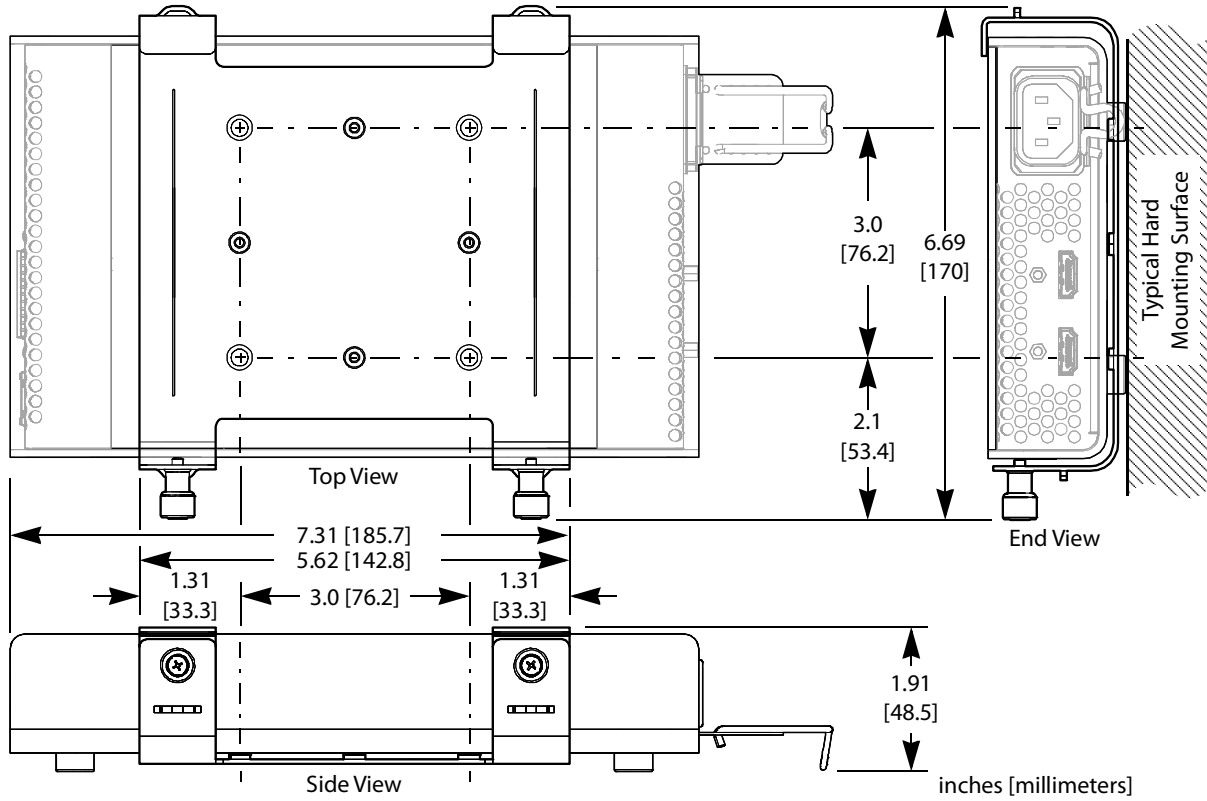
IPVU-MOUNTING-KIT dimensions for a hard surface installation
